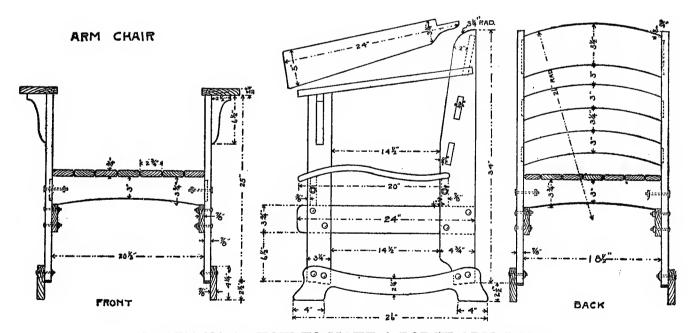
A—HOW TO MAKE A PORCH ARM CHAIR
